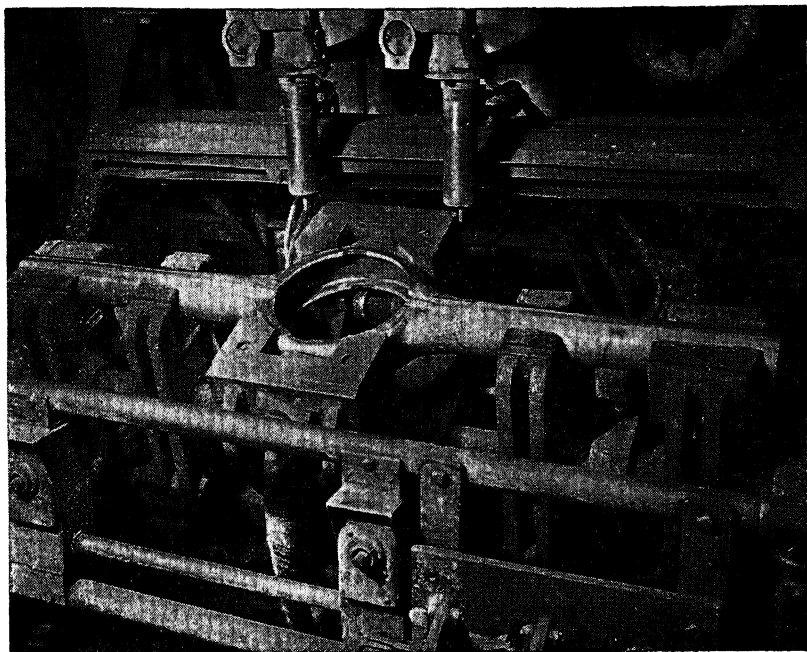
Setup for automatic welding of rear axle housing.
